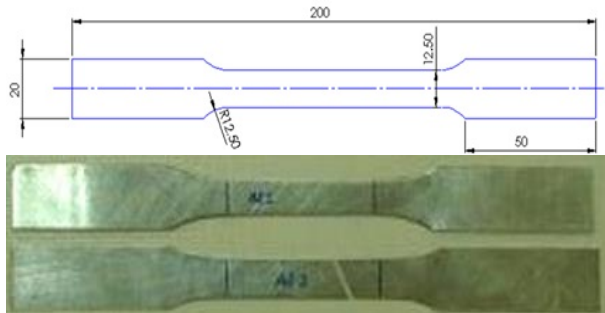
(a) Specimen dimensions and (b) samples of tensile test of AA5052 aluminum alloy sheet.
